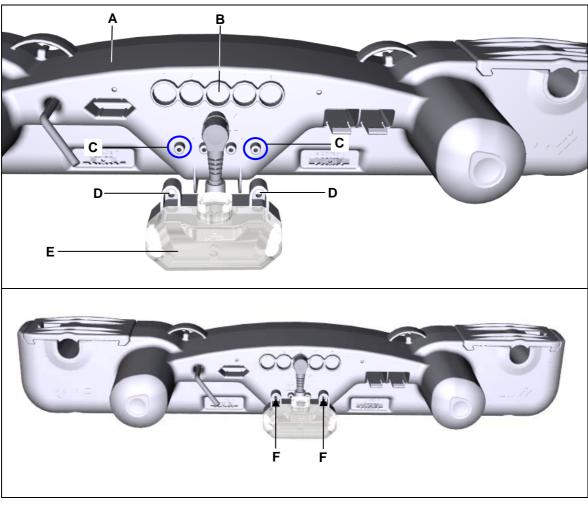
Mounting to a double drive (for example, the DUOMAT 8)
